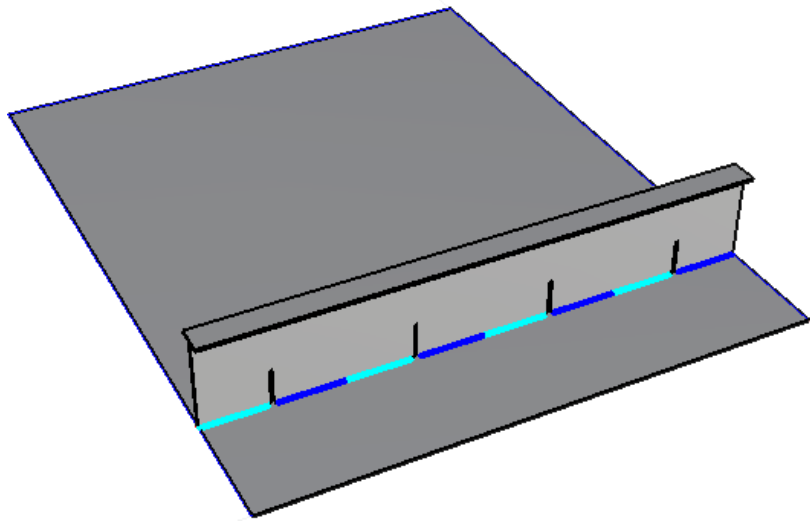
Weld beads of W1 and W2 welding lines
